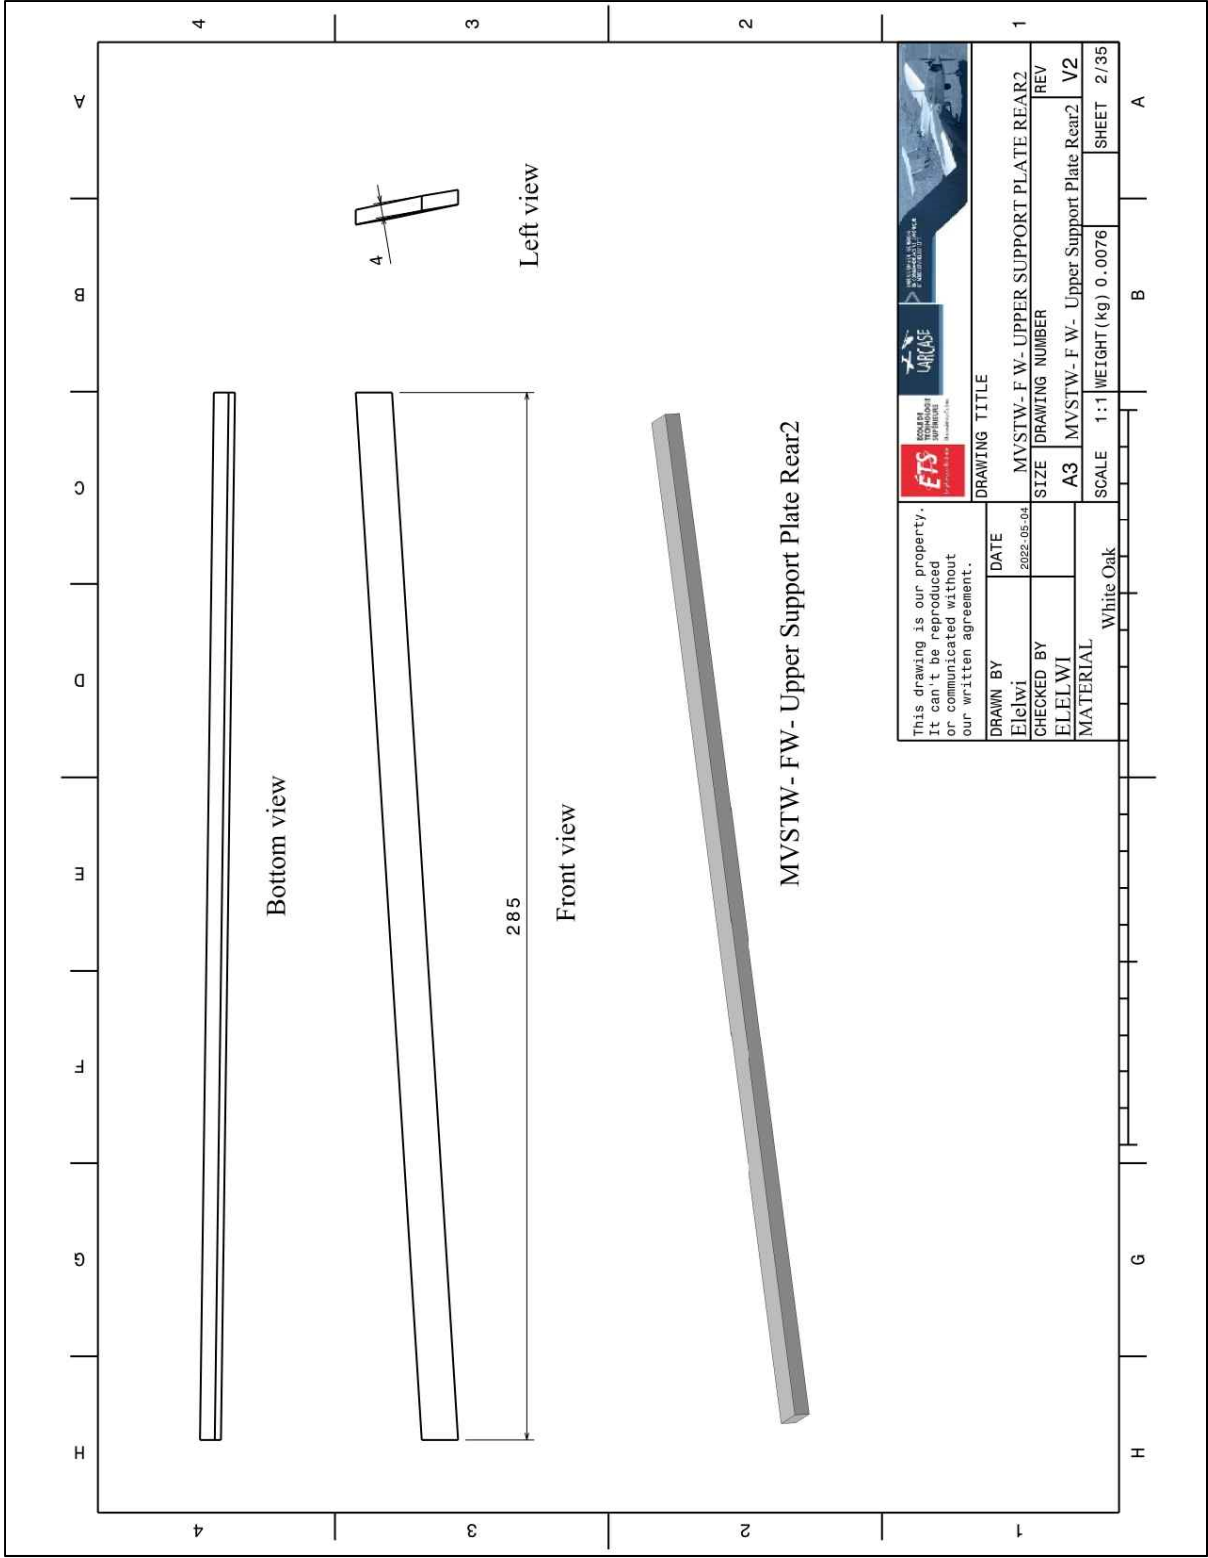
MVSTW Fixed Wing Upper Support Plate Rear2 Using White Oak
